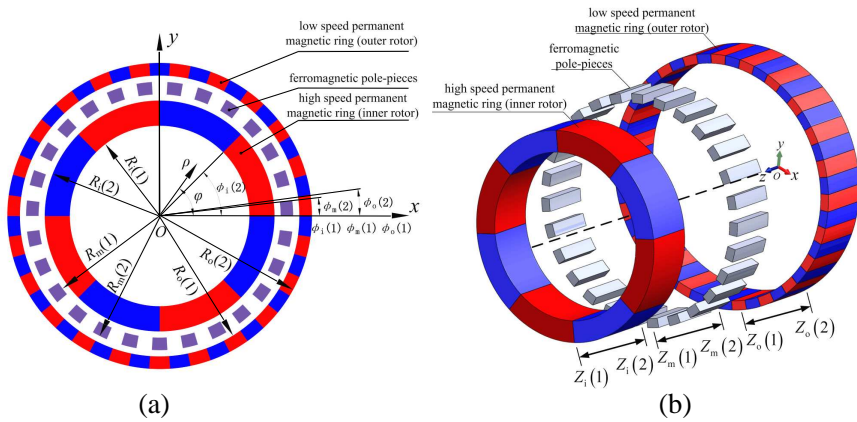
Field modulated permanent magnetic gear. (a) Cross section of the considered magnetic gear. (b) Exploded view.
